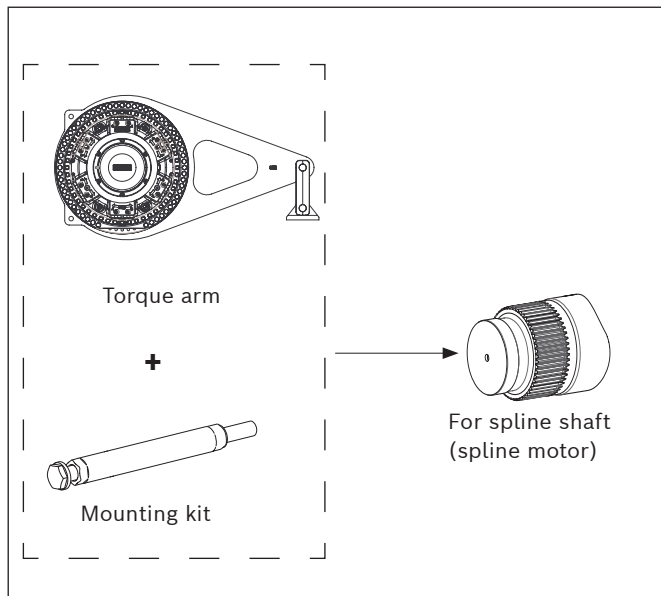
Single ended torque arm mounting at spline shaft, only allowed for CBm 2000 to CBm 4000 (Not allowed for CBm 5000 to CBm 6000)
